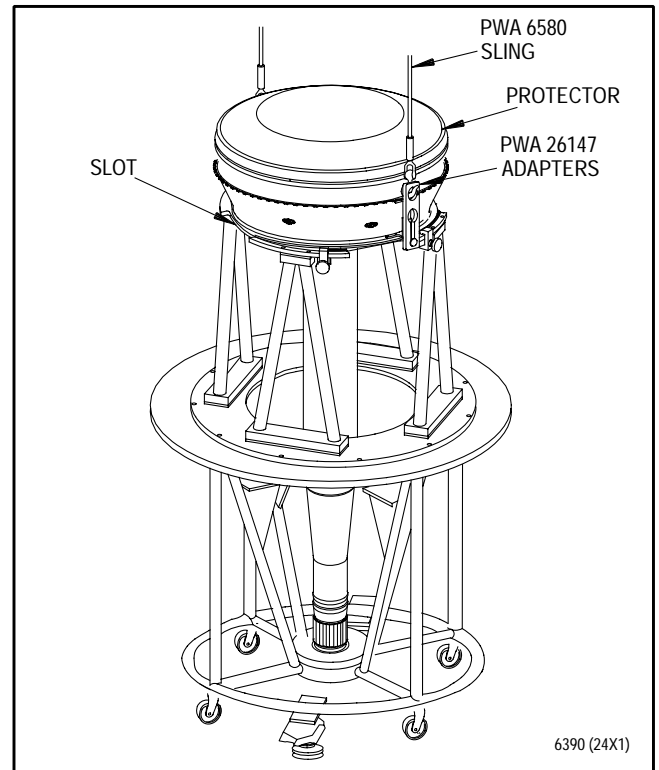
Fan Drive Turbine Module - Installation Into Vertical Build Stand (Sheet 7 of 9)
